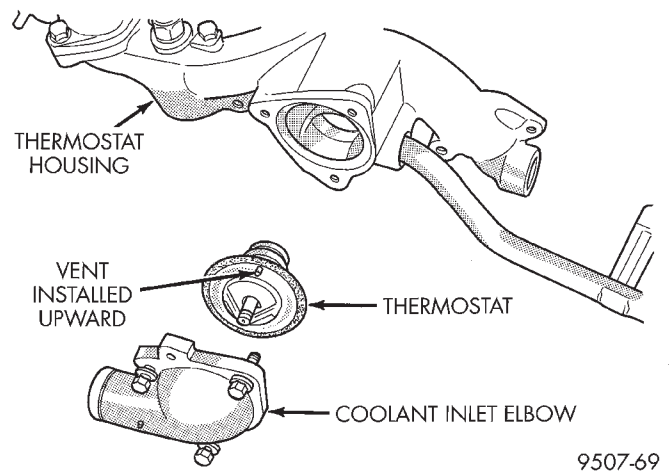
Thermostat, Housing and Inlet Elbow—2.5L Engine
